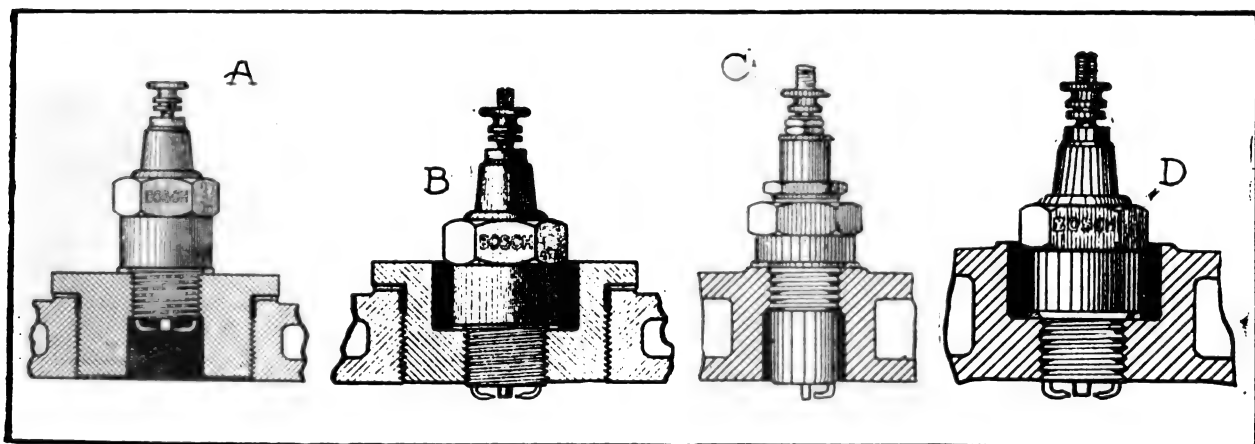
A, Spark Plug in Valve Cap with Pocket That Prevents Perfect Firing; B, Same Plug Bored to Seat the Plug Electrodes in the Combustion Chamber; C, Plug with Extension Through Cap That Is Not Well Cooled; D, Plug Seated in Cored Cap to Insure Efficient Cooling and Good Firing.
